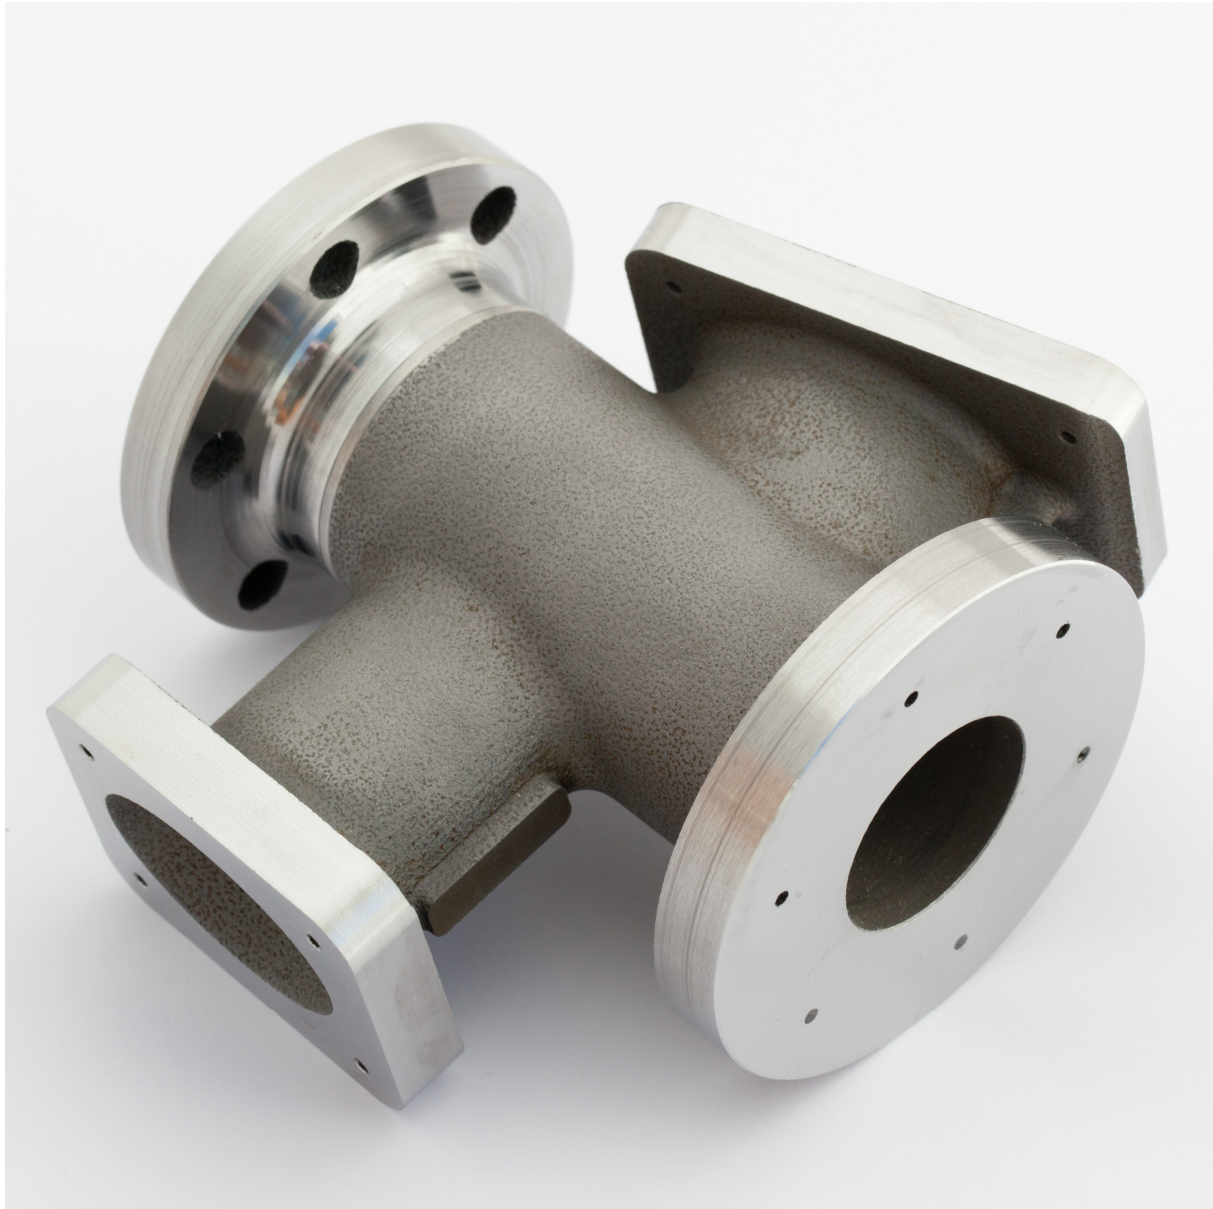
The machined mock-up component. The support structure of the top flange has been machined off (top left).
